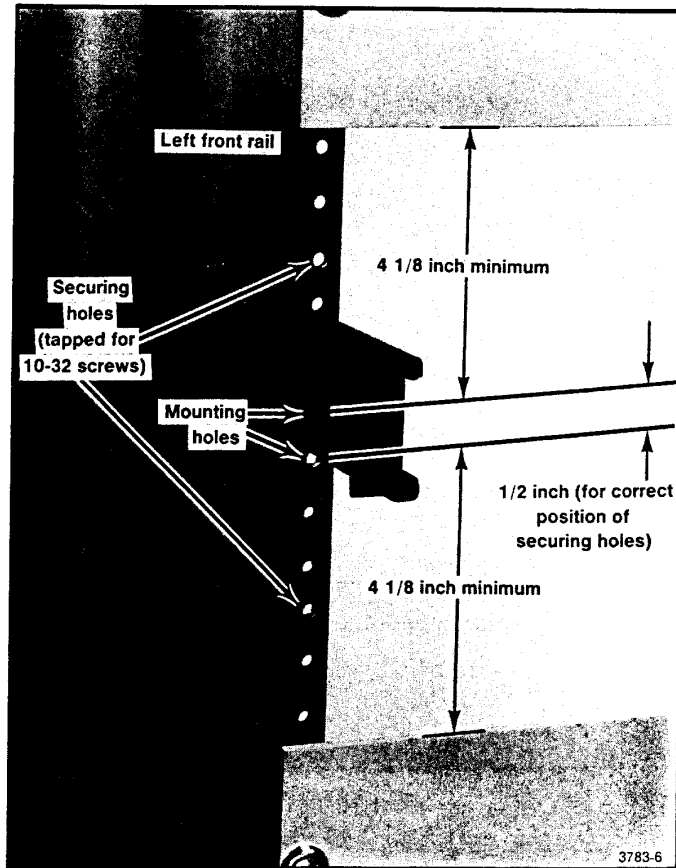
Measurements of front-rail mounting holes for the stationary sections.
